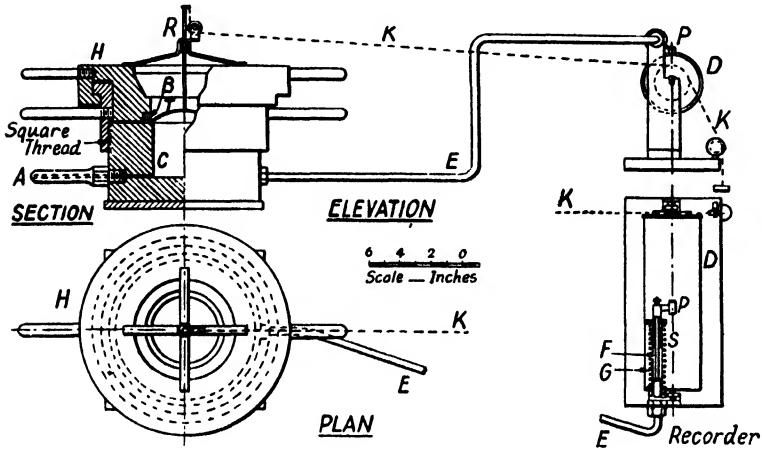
N.P.L. HYDRAULIC CUPPING TEST MACHINE
